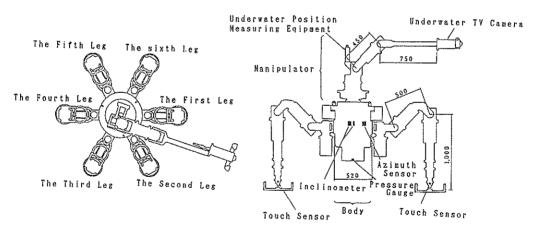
Principal Dimensional Shape of the Aquarobot 2
